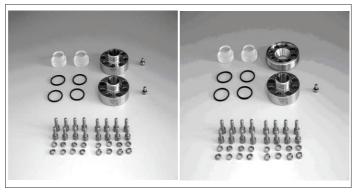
Parts required for assembly (Window rings, windows, screws, washers, and gasket set)
